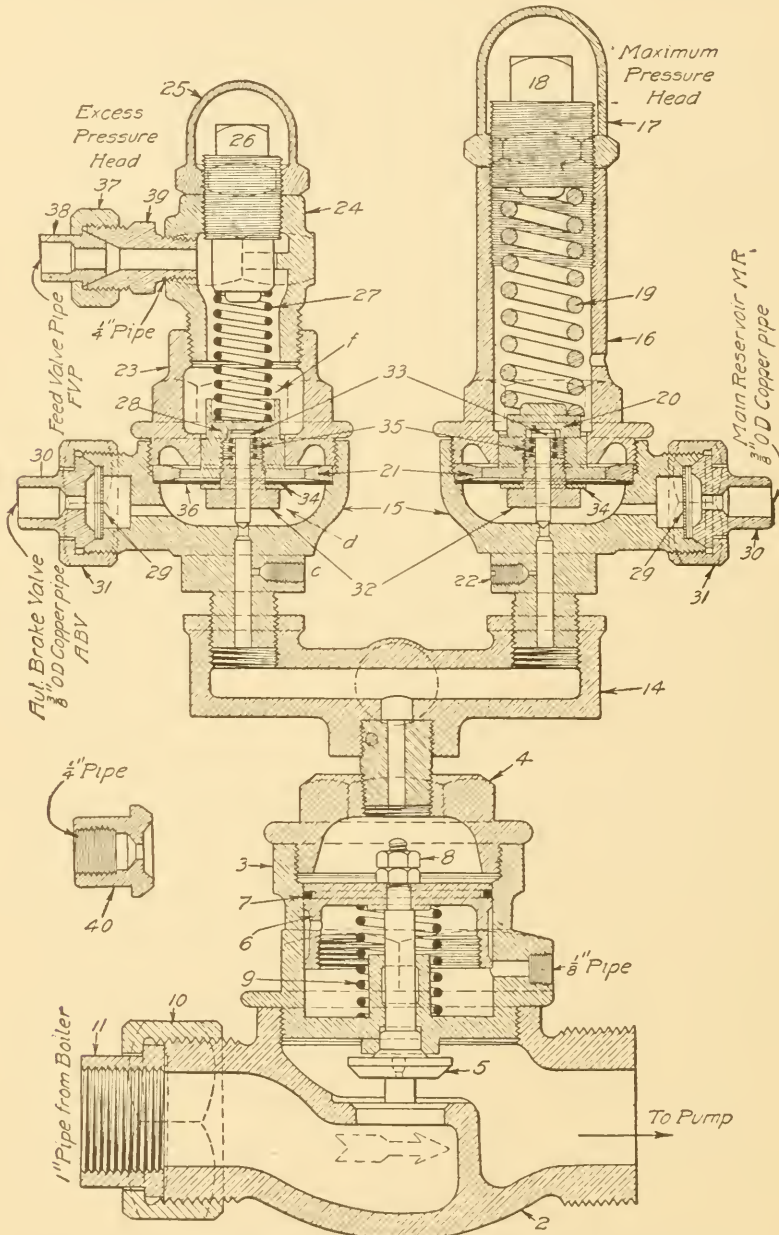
Westinghouse Type "SF" Duplex Steam Compressor Governor Shown in Section
